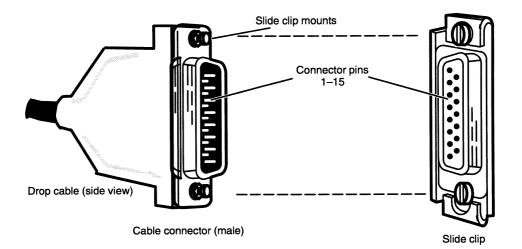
Aligning Slide Clip Mounts with a LAN Connector
